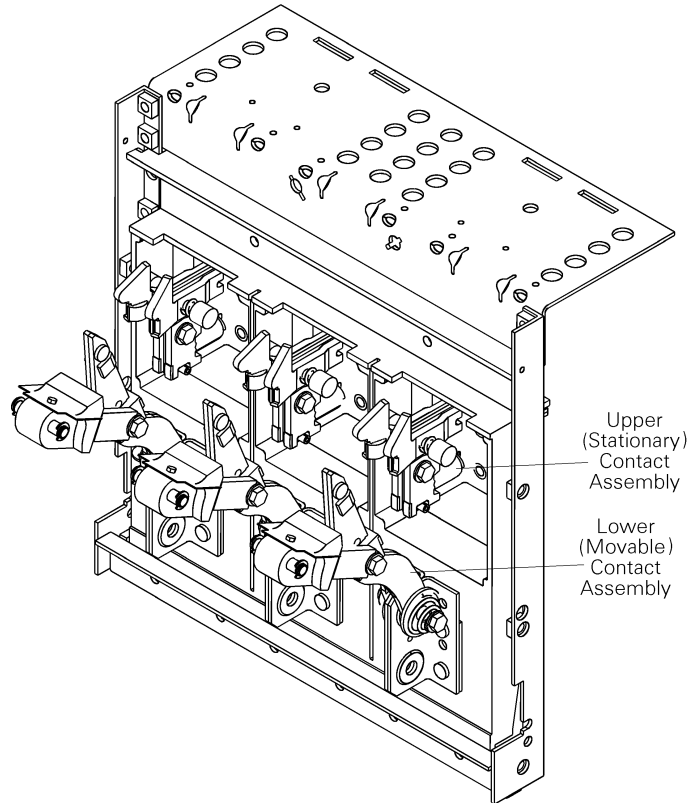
Typical back frame assembly, EGS08, EGF08, and EGH08.
